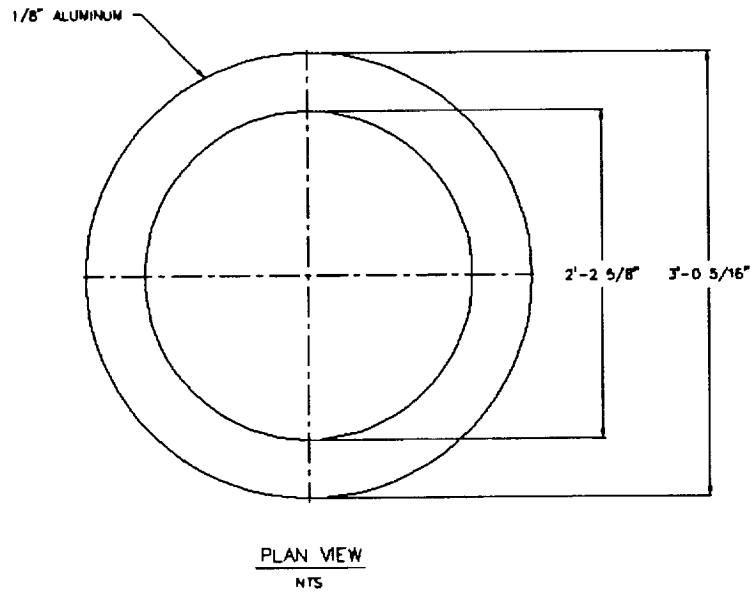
Heat Shield Shroud Dimensions
